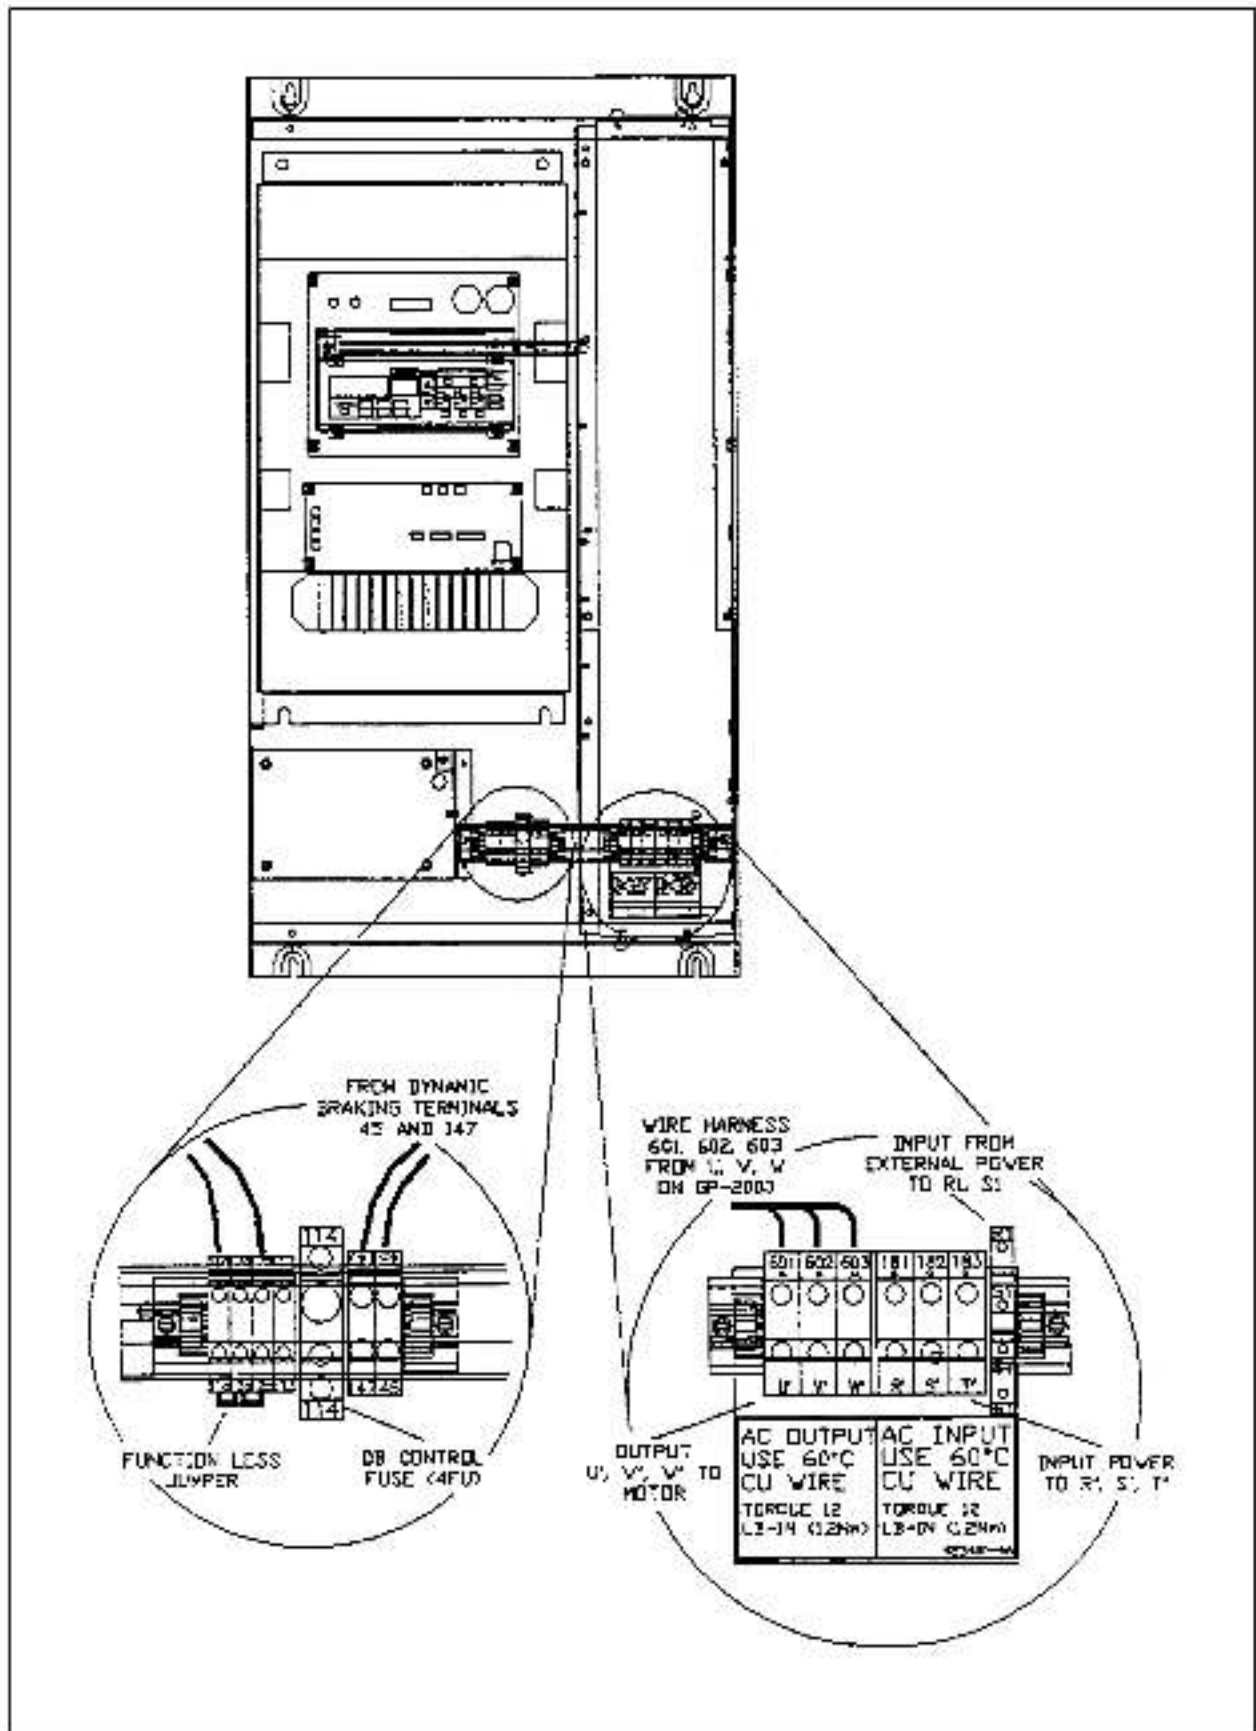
Expanded Cabinet DIN Rail Terminal Board Wiring Locations.
